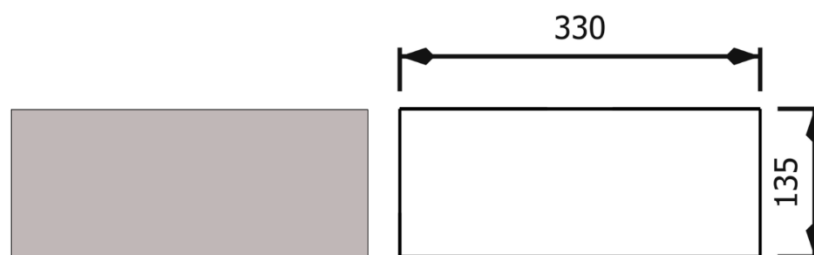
Front and back view of the schematic representation of the calorimetric assembly (reactor, heat flow sensors and heat sink). Dimensions in millimetres.
